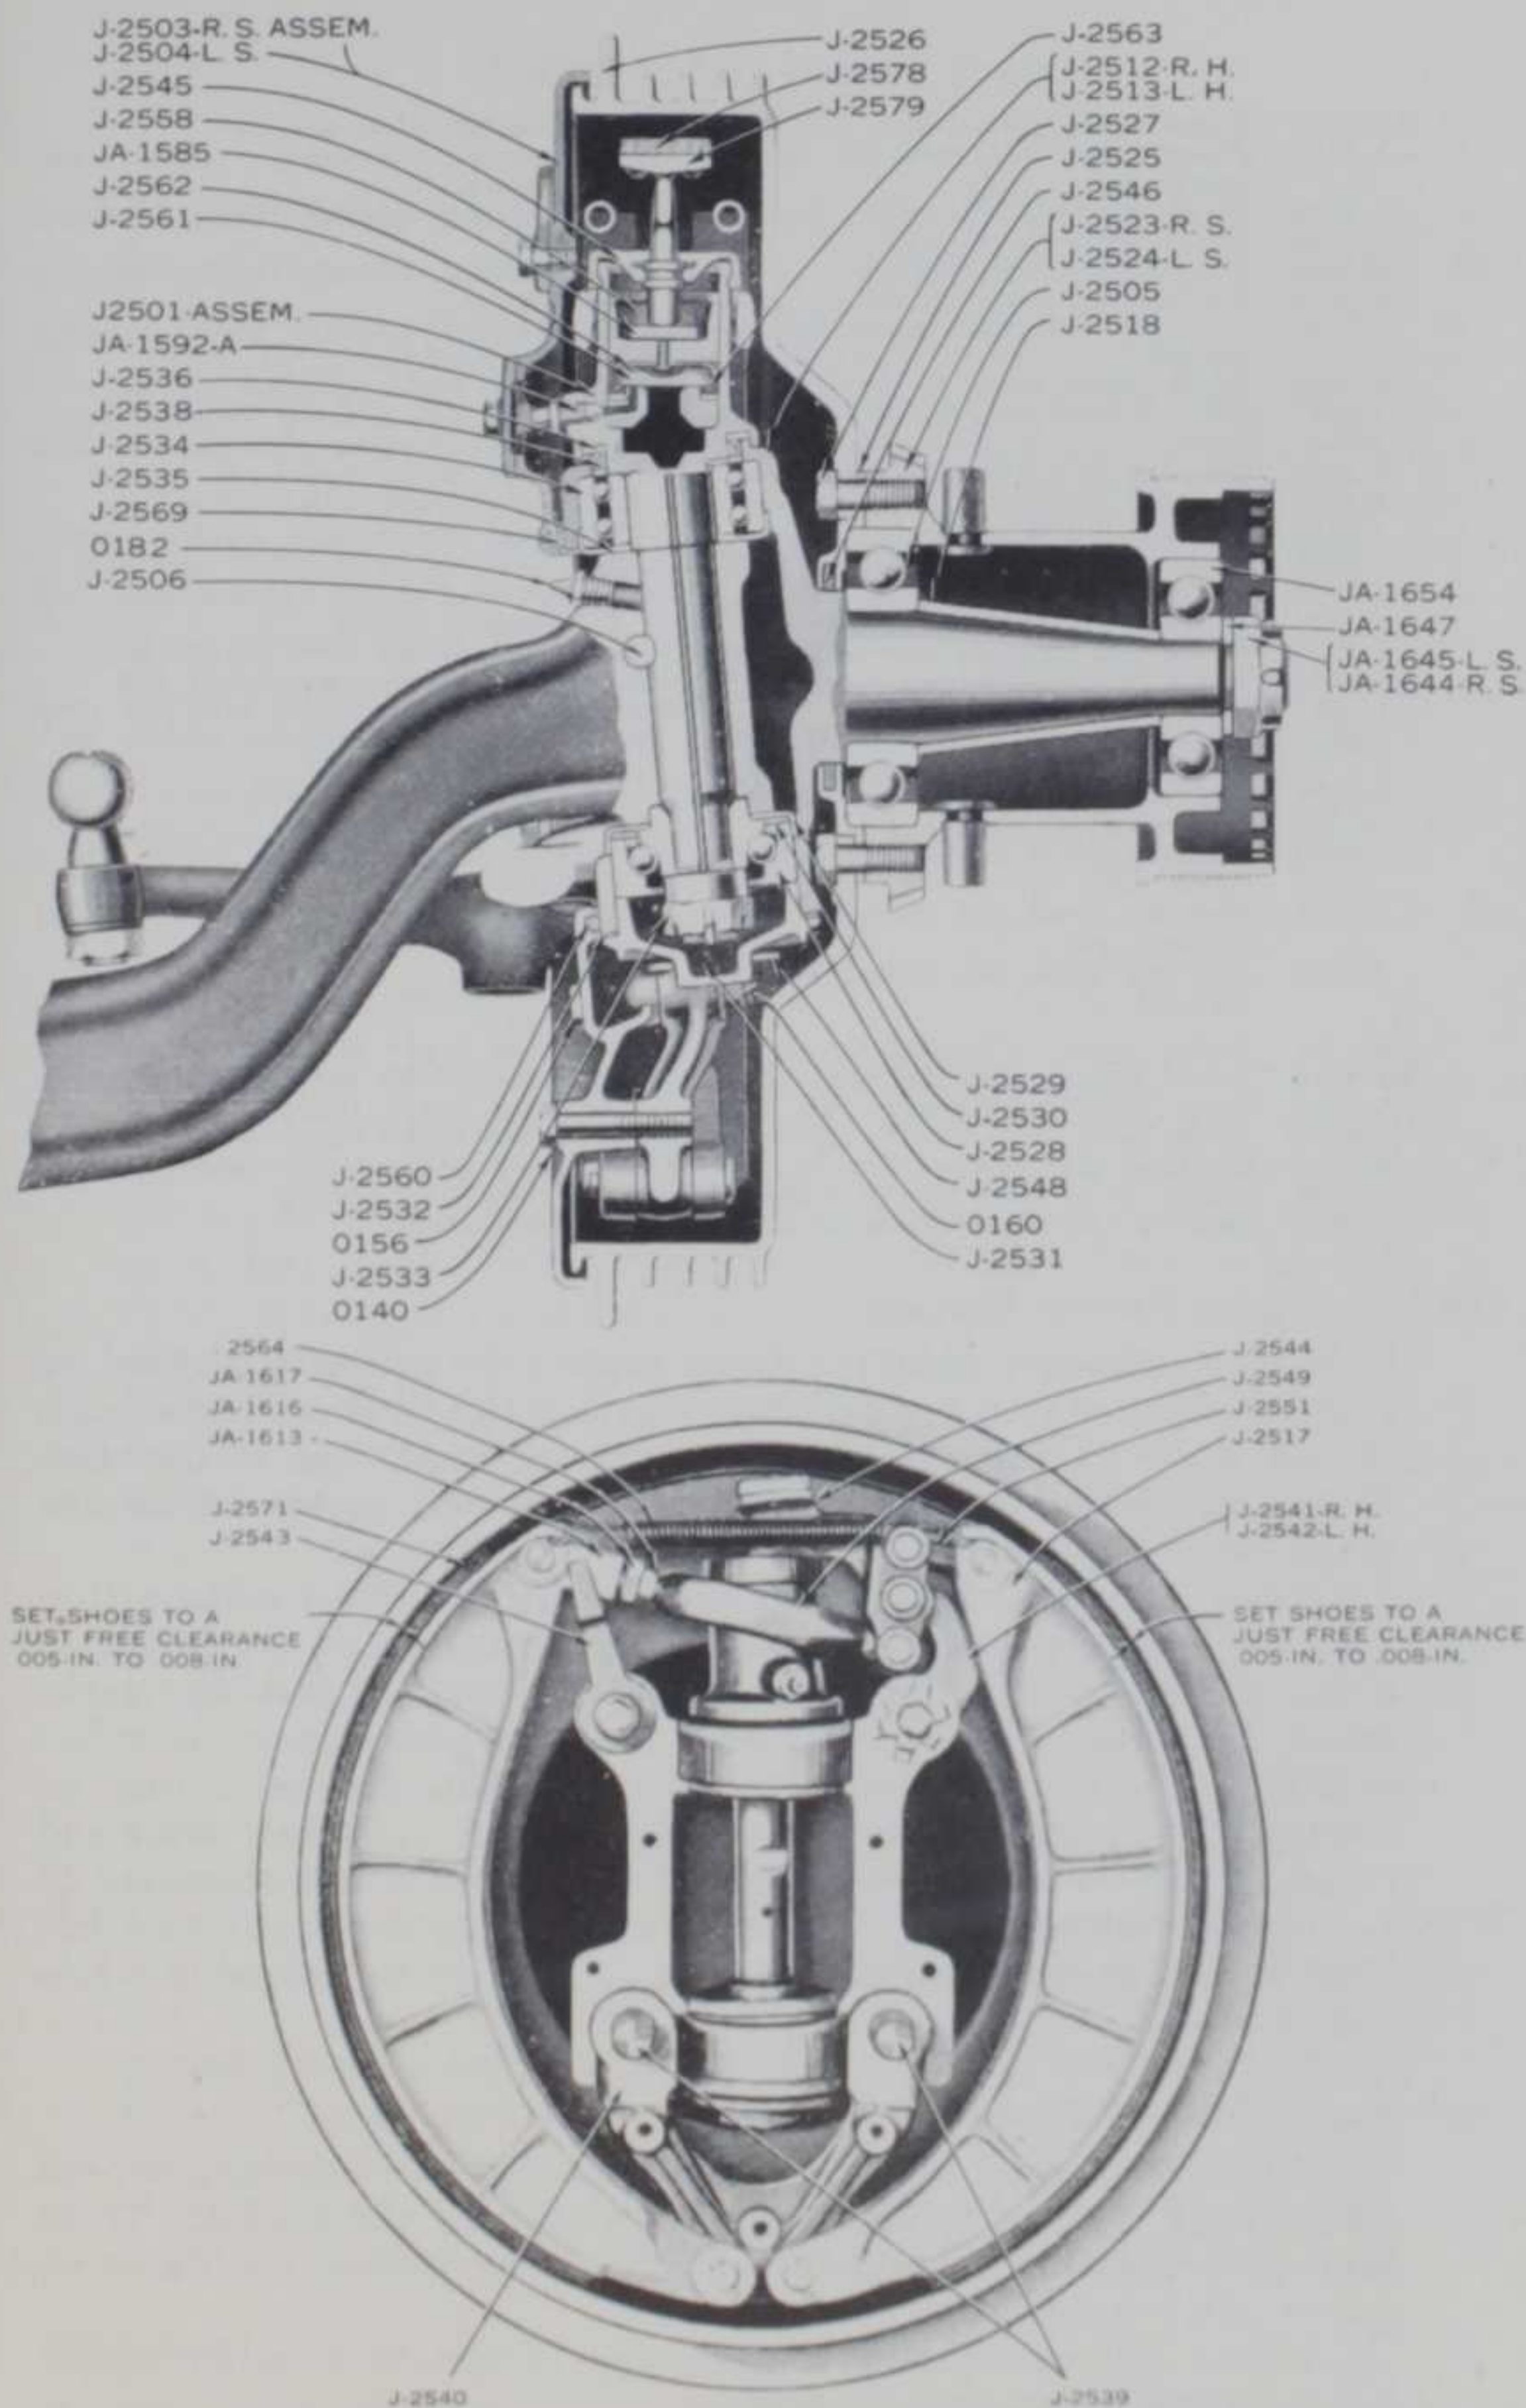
Cross Sectional View of Front Axle and Wheel Brake Assembly
